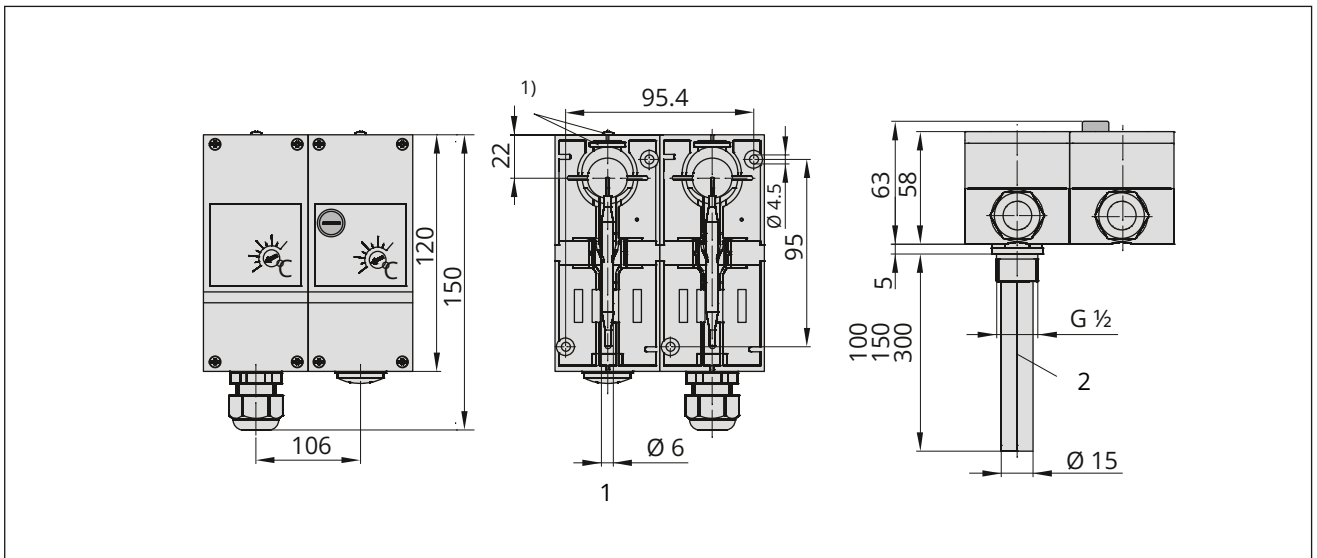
Dimensions in mm · Type 5349 Double Thermostat STM/STL
